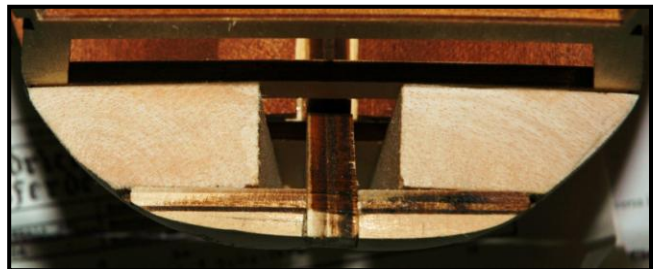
Careful Use of Limited Material to Form Bow Filler Blocks
